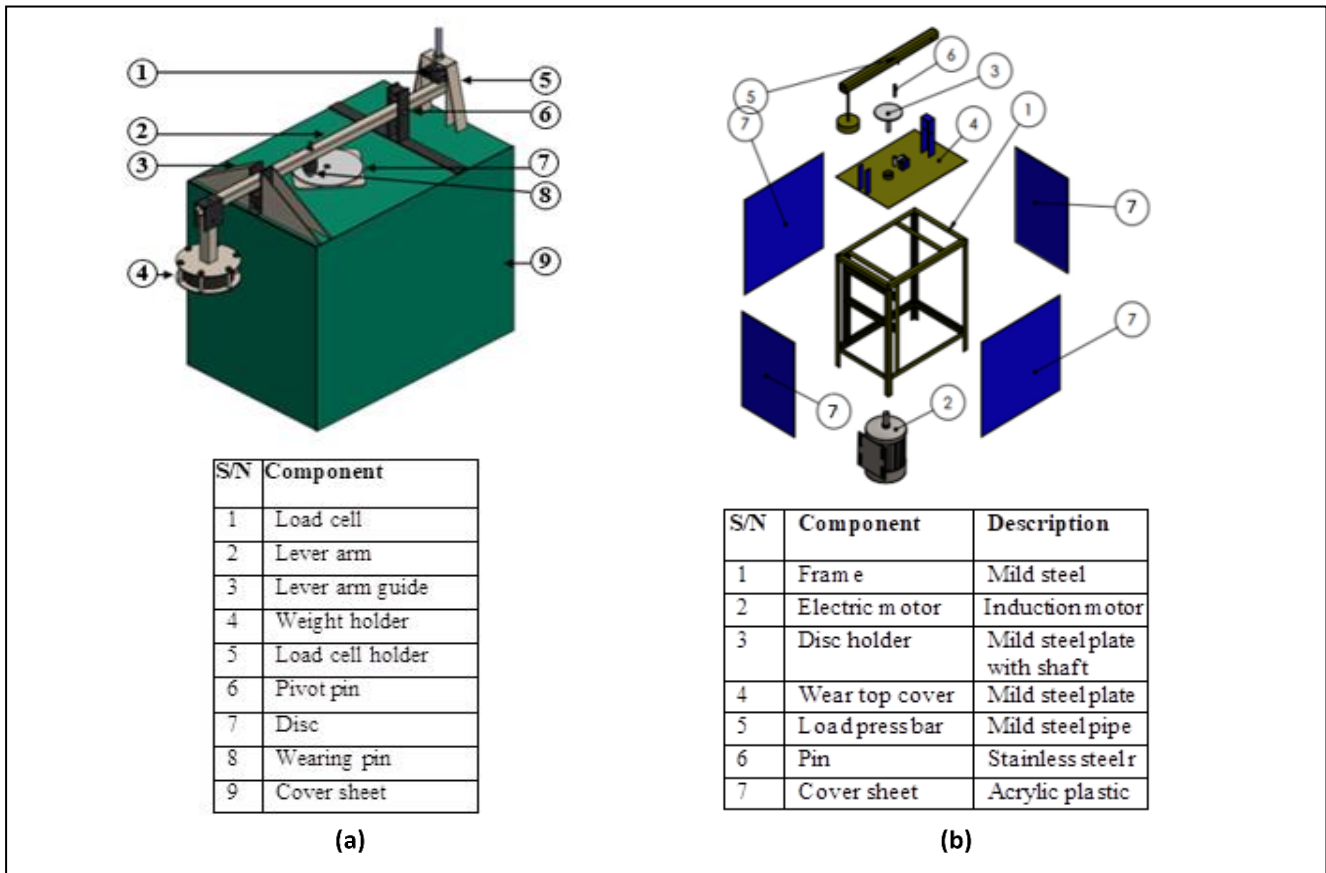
(a) Schematic diagram of the wear testing machine and (b) Expanded details of the designed Pin-On-Disc wear testing machine
